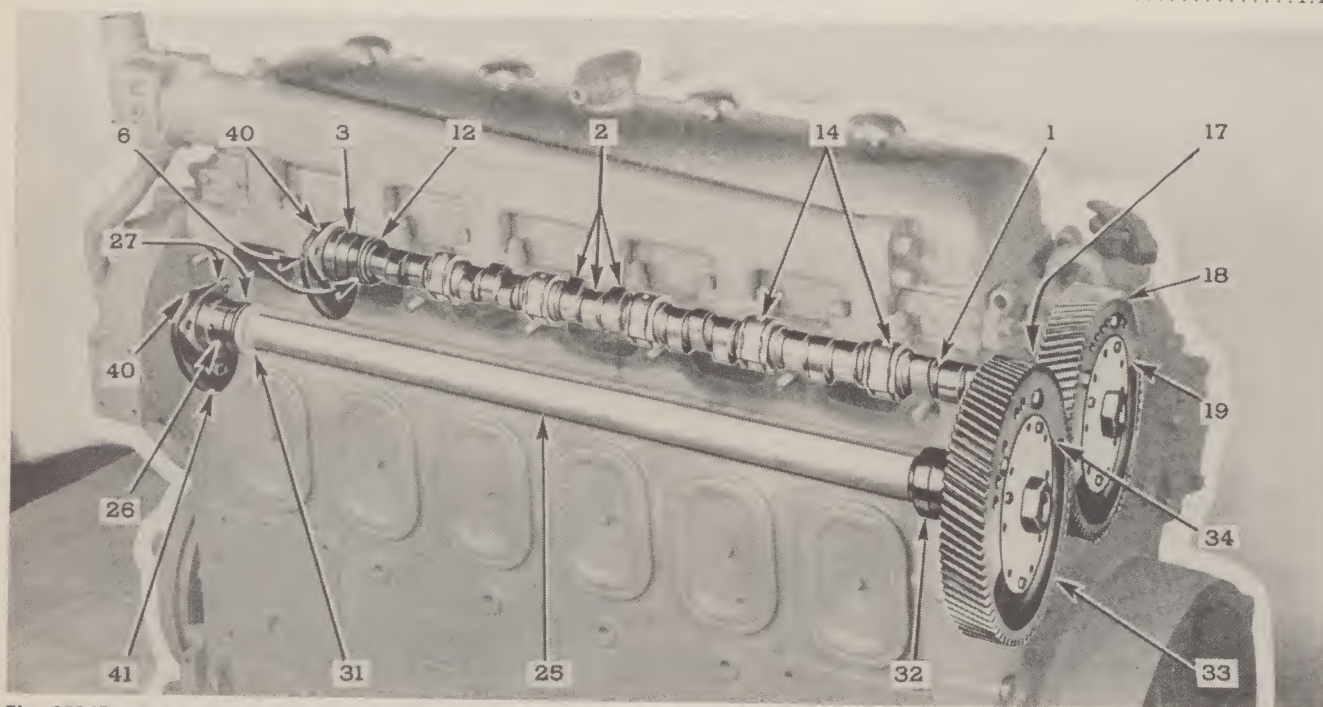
B—A 6 cylinder GM engine showing installation of camshaft and balance shaft. A similar installation is used in the type RB engine for the Oliver Super 99 GM tractor. Location of camshaft (1), balance shaft (25), thrust washers (6 and 27) and thrust bearings (3 and 26) will vary according to engine type as shown in Fig. 0499C.
